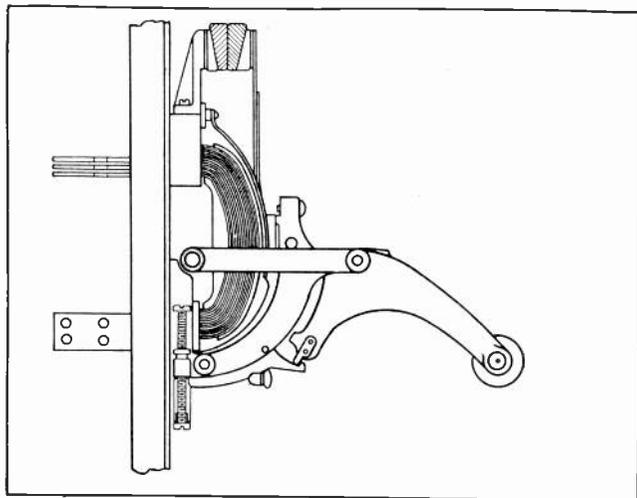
This sketch shows a side-view of a circuit breaker in closed position and illustrates the copper "leaf" construction of the main contact. Note the copper stubs which project through the board for connections to bus bars.
